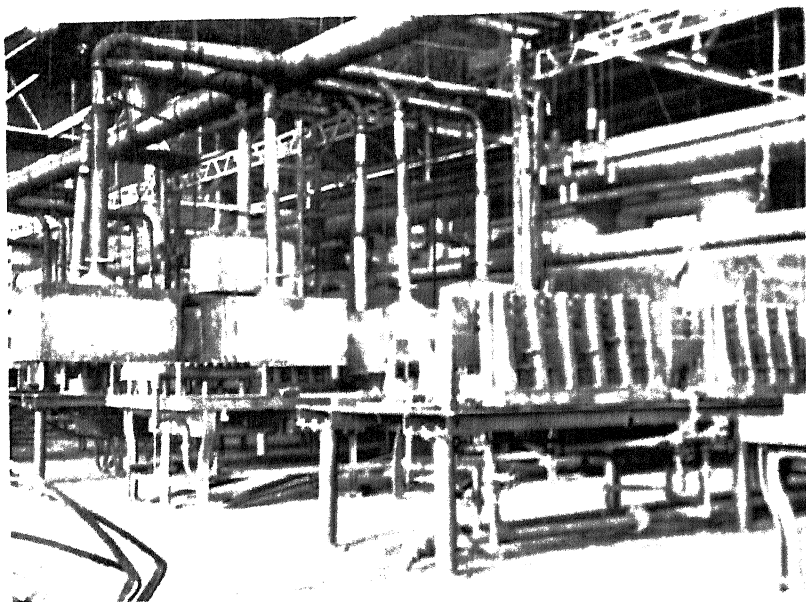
Steam Press employed in Mica-plate Manufacturing,
